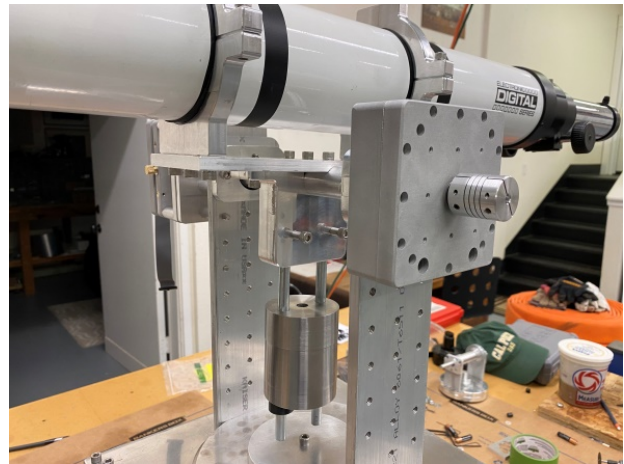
Side view of the encapsulated harmonic drive before installing the motor
